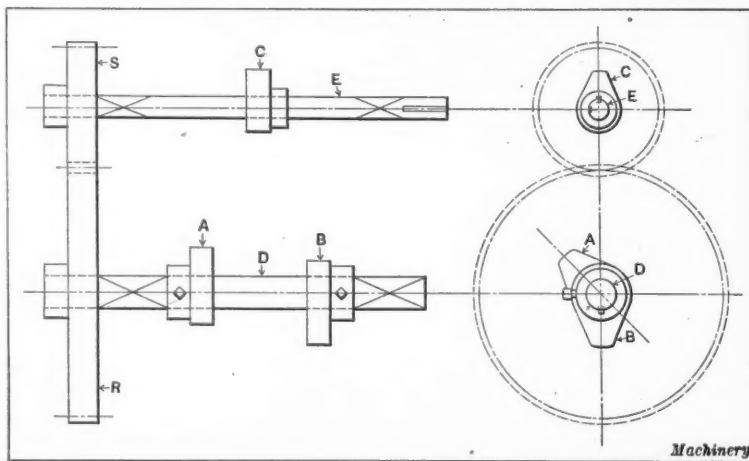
Mechanism illustrating Factors controlling Timing of Parts
